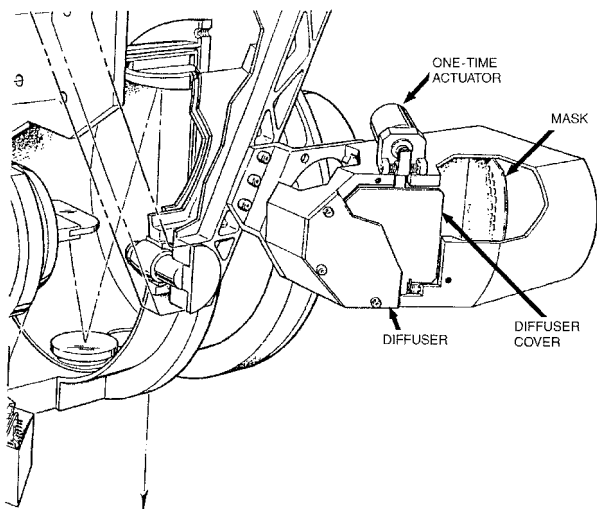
Illustration of the solar diffuser assembly mounted to the SeaWiFS scanner.
